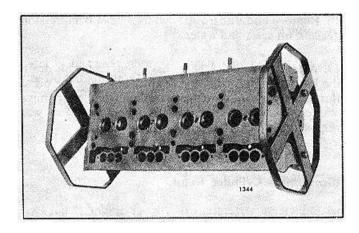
Cylinder Head Mounted on Holding Plates (J 3087-01)
